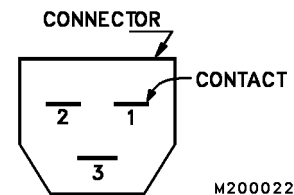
INCLINOMETER SIDE CONNECTOR VIEW
